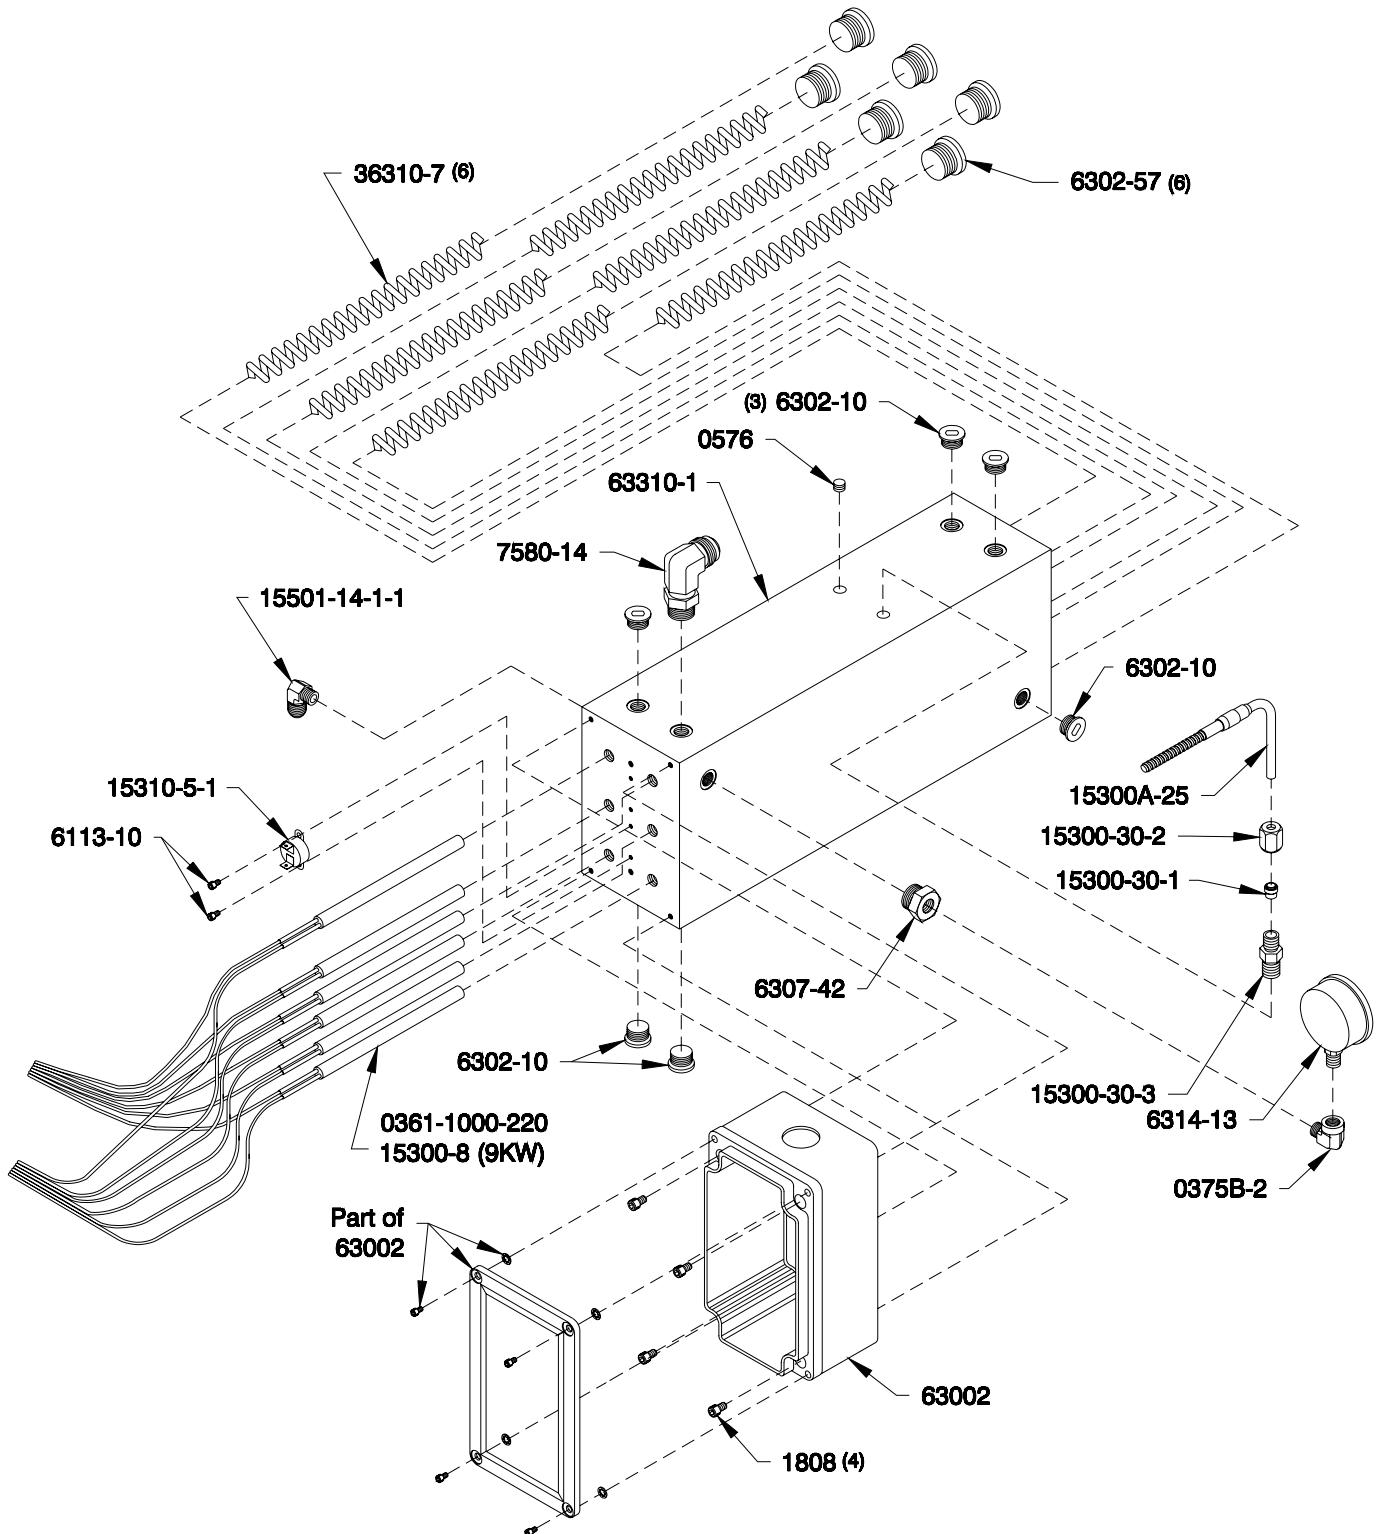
A-Primary Heater Assembly (Part No. 63360-240 and 63360-240-9KW), Exploded View
